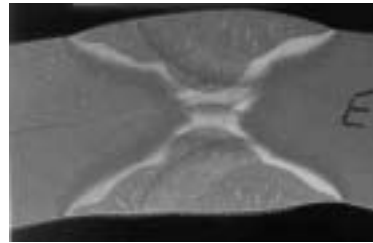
Cross section of longitudinal pipe weld (wall thickness 20 mm).
